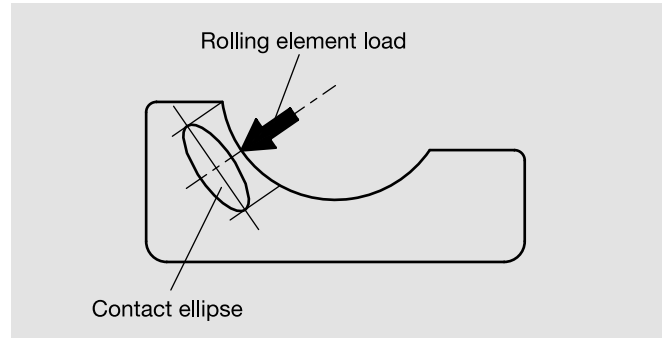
Limiting Axial Load in Terms of Surface Pressure
